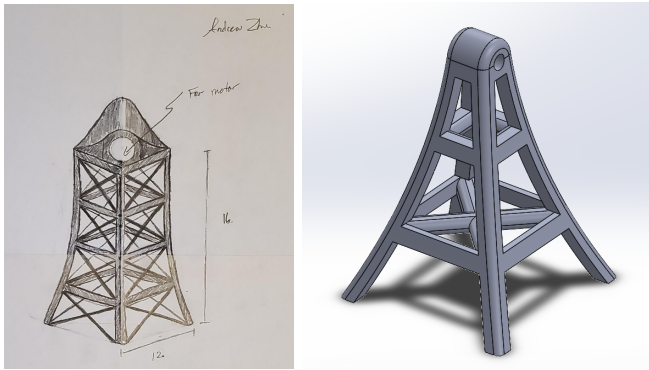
Andrew's concept design drawing. Figure 9b: Andrew's concept design CAD
